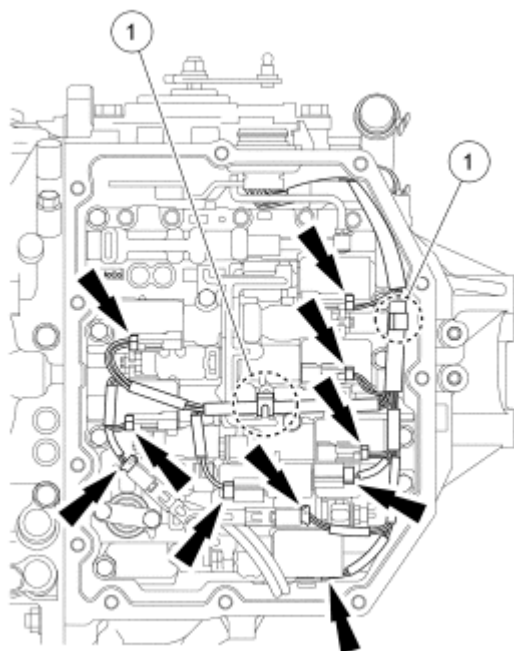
Identifying Transmission Fluid Temperature Sensor, Bolt & Lock Plate
